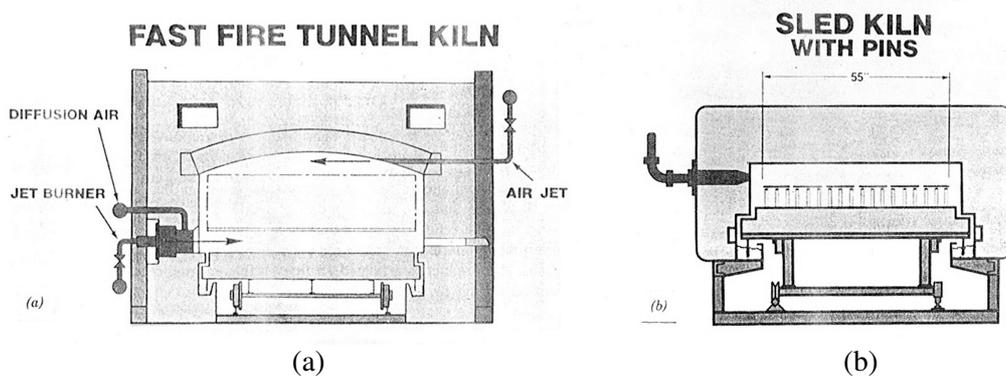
Cross-section of kilns, (a) Car-type kiln, (b) Sled-type kiln
